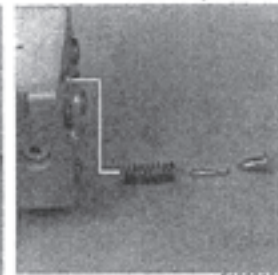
Remove Pilot Piston Pin and Control Start Spring
